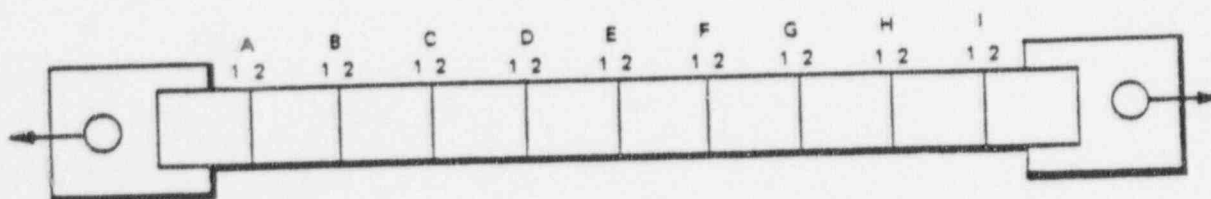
Typical Weldment Makeup for Large Environmental Fatigue Pipe Tests
